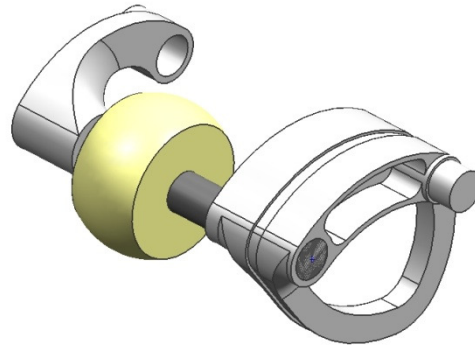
CAD model of the follower and roller assembly used with the external inverted cam design.
